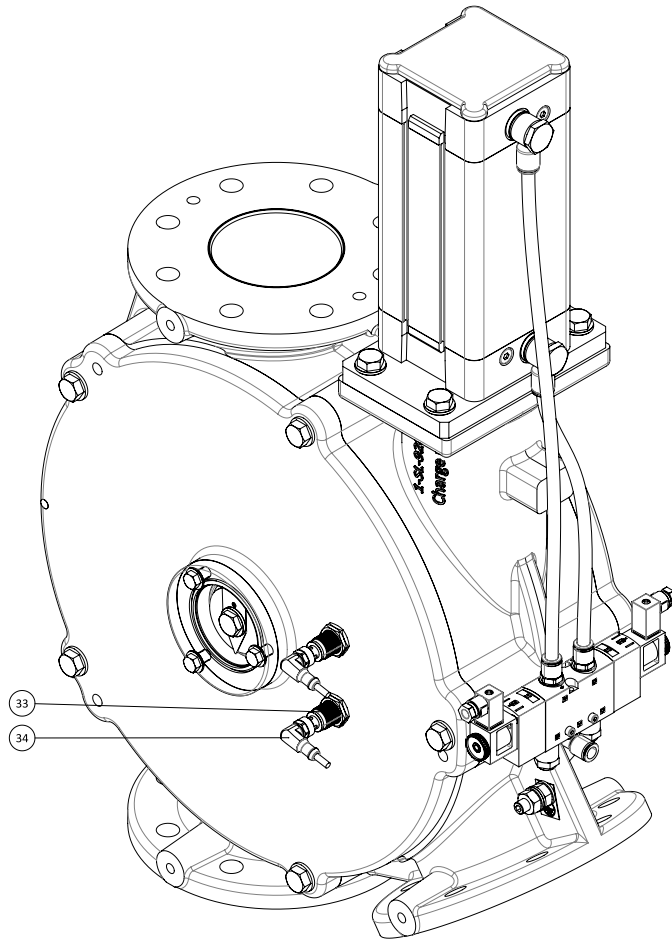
Remove the socket and sensor from the end cover (PTD)
